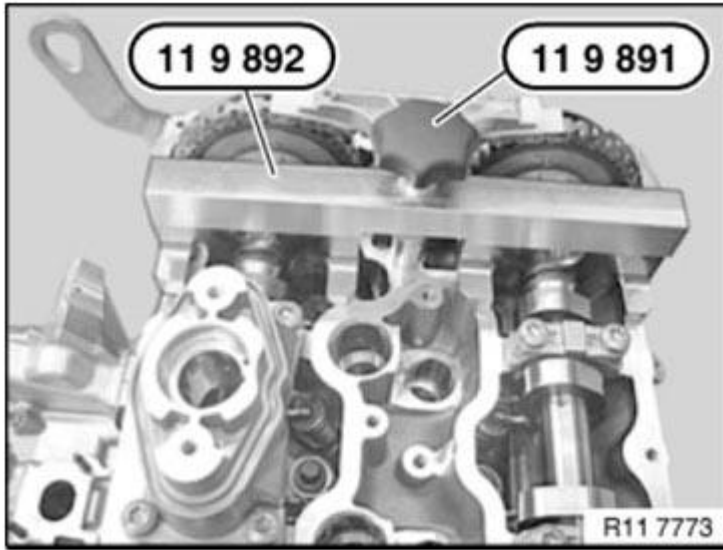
Positioning Special Tool 11 9 892 On Special Tool 11 9 893
